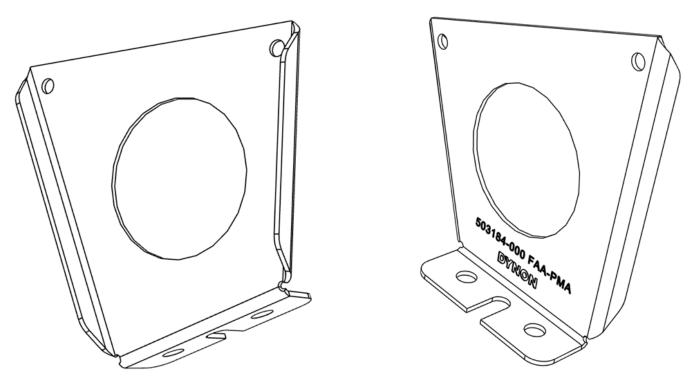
Cessna 172 Fuel Flow Sensor Mounting Bracket, 503184-000
